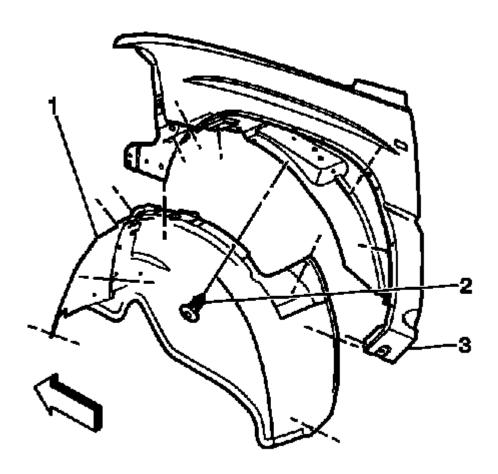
View Of Wheelhouse Panel & Push-In Retainers Courtesy of GENERAL MOTORS CORP.
